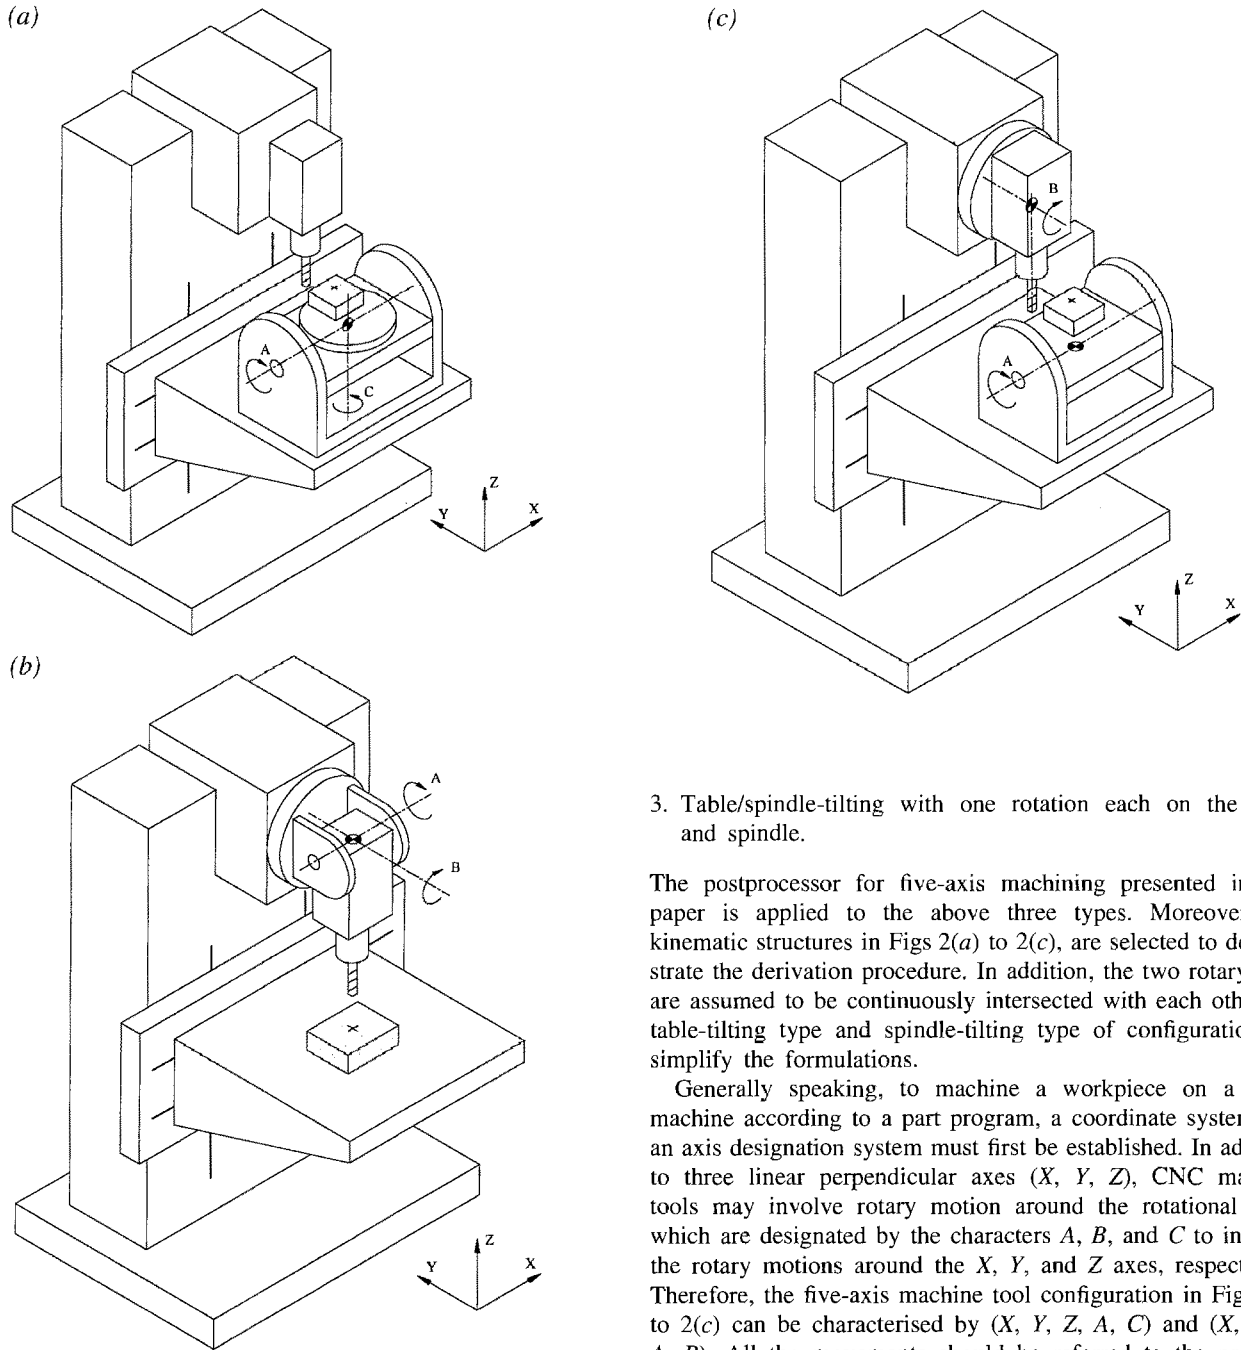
Configuration for three kinds of five-axis machining centres. (a) Table-tilting type. (b) Spindle-tilting type. (c) Table/spindle-tilting type.
